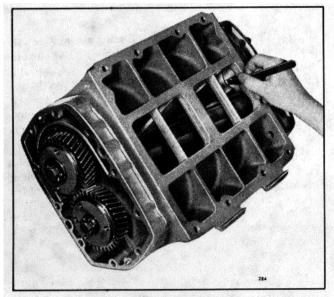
Measuring End Clearance Between Blower Rotors and End Plate .
